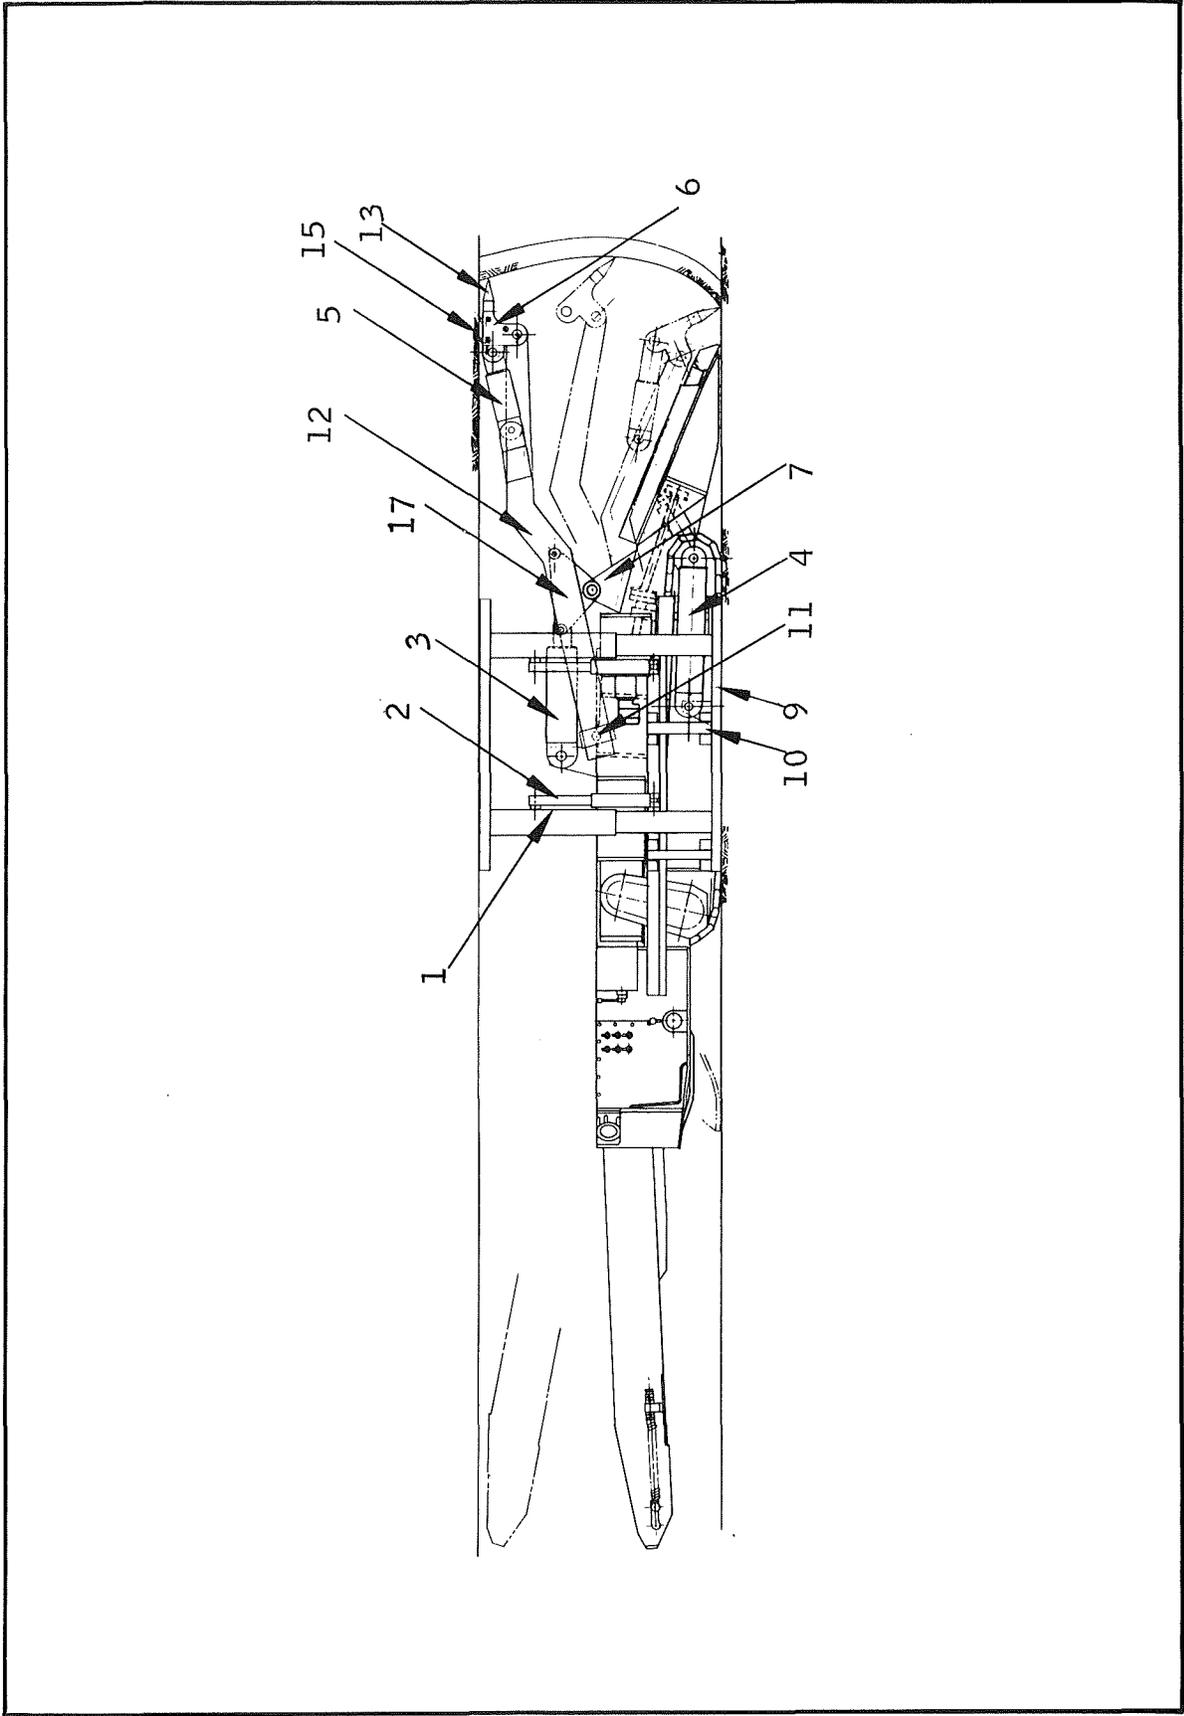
LAYOUT DRAWING, ARTICULATED HEAD CONCEPT
